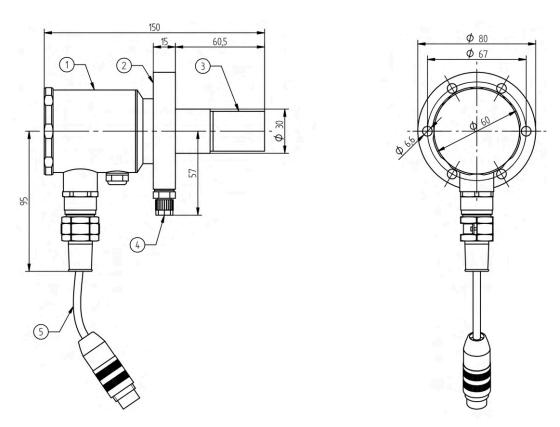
Dimensional drawing Combination Probe KS1D-BF (dimensions in mm)
